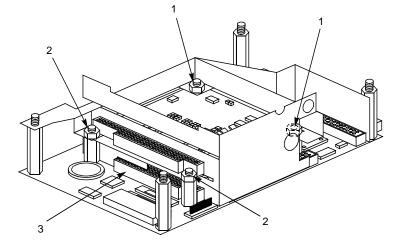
Removal of the DC/DC Converter Circuit Card Assembly
